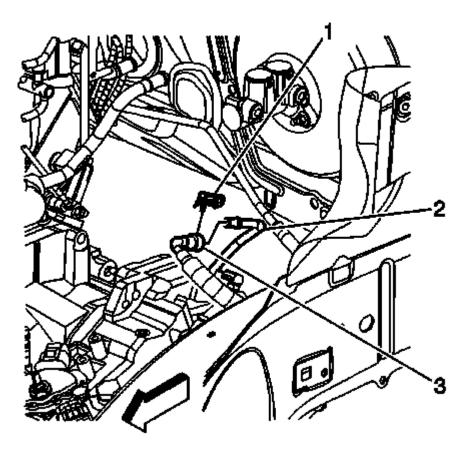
Disconnecting/Connecting Engine Fuel Hose/Pipe At Chassis Fuel Hose/Pipe Courtesy of GENERAL MOTORS COMPANY
